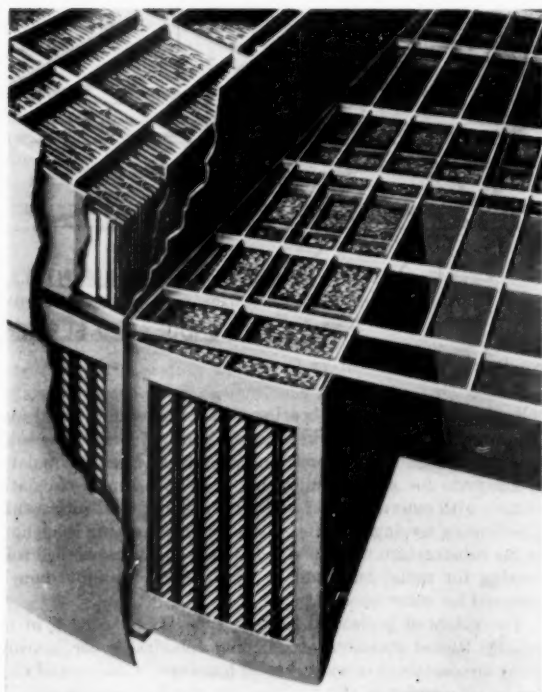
SECTIONAL VIEW THROUGH PORTION OF ROTOR OF INVERTED HEATER SHOWING ARRANGEMENT OF BASKETED HEATING ELEMENTS
